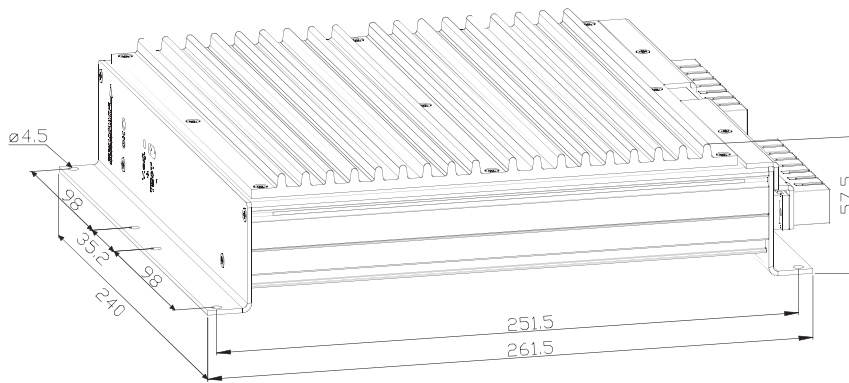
N-Mechanics, side view PSC800 with one extra cooler, T3
